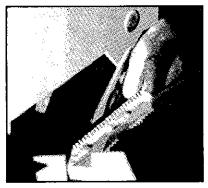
KNIFE REMOVAL OR INSTALLATION
